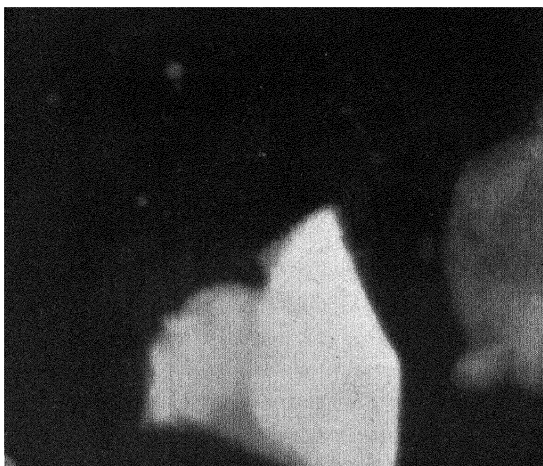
HIDDEN FLAWS SHOWN IN A RADIOGRAPH OF A STEEL CASTING
